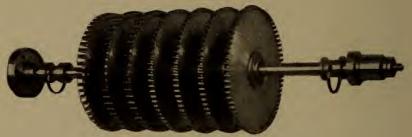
Kerr Turbine Wheels Assembled on Shaft
